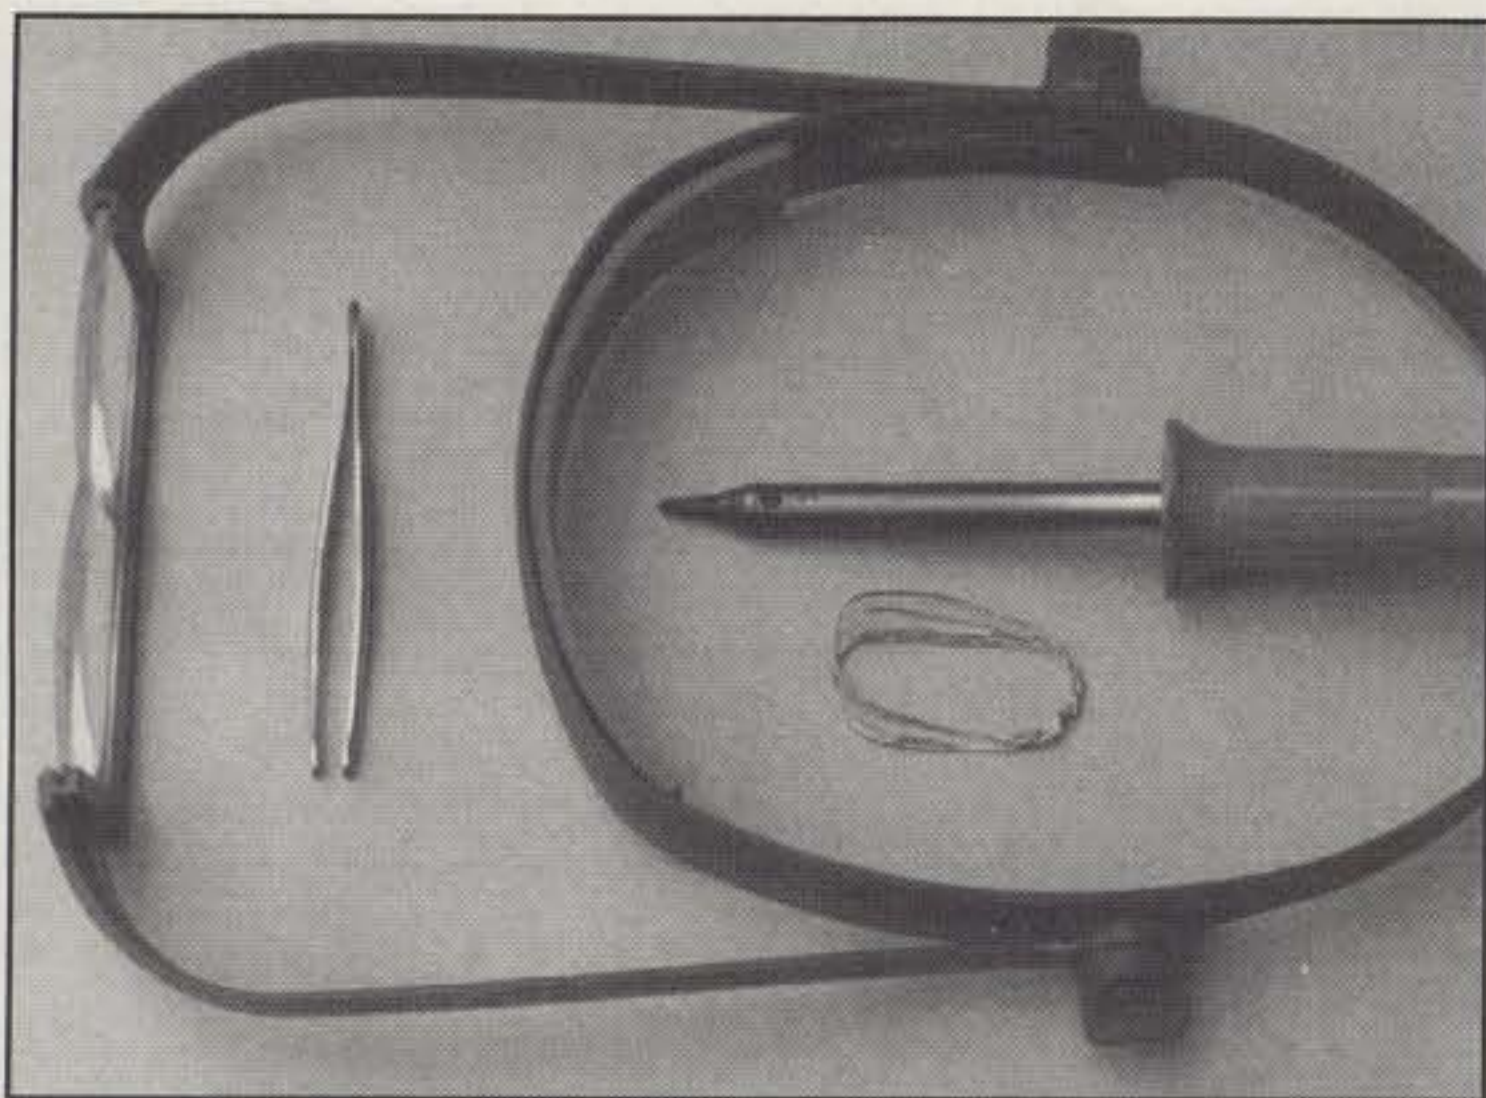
Basic tools for surface-mount work include a high-power magnifier, accurately mating eyebrow tweezers, pinpoint-tip soldering iron and ohmmeter test leads, ultra-fine 2% silver solder, and some thin solder wick for desoldering if/when required. (Discussion in text.)
